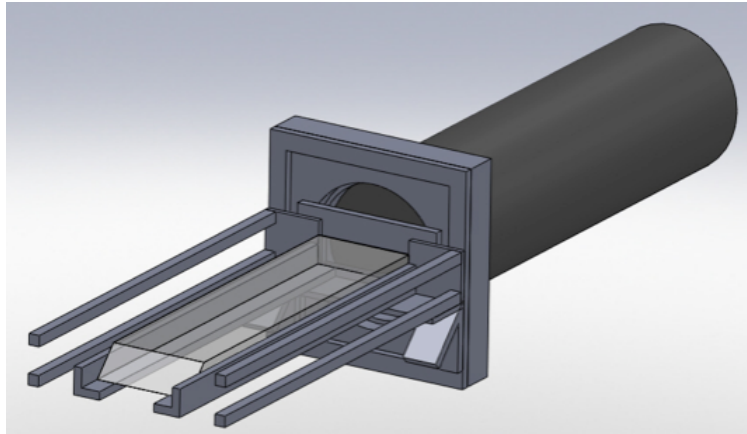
CAD drawing of the flat MOLLER detector design.
